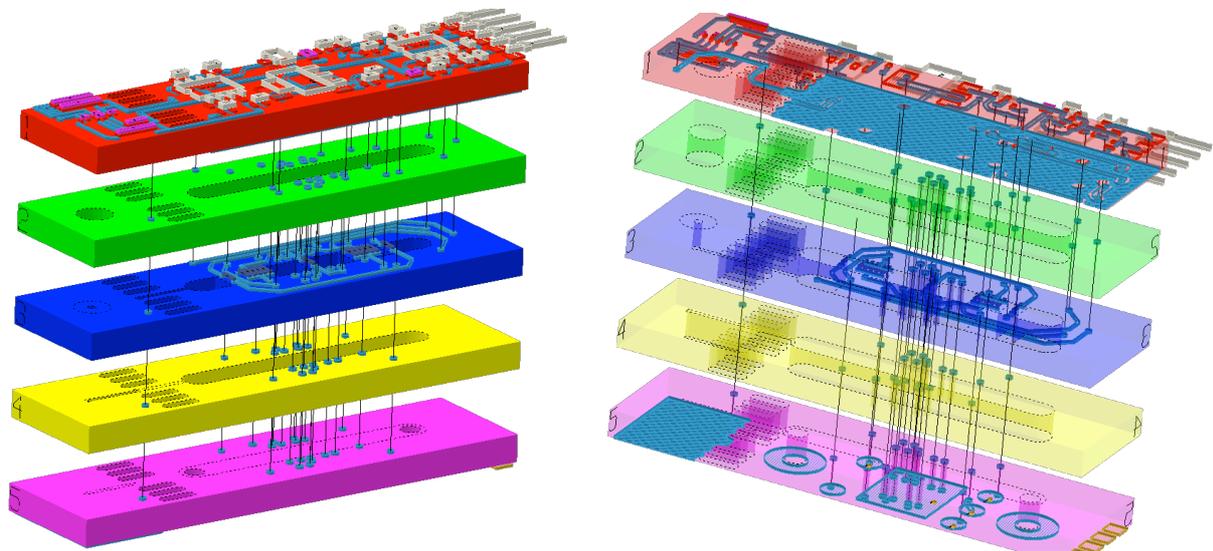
(a) 3D exploded top view of the integrated sensor, showing the five LTCC tapes. (b) 3D exploded bottom view, semi-transparent.
